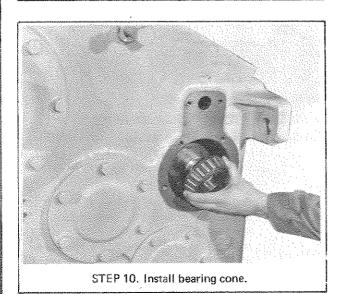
Reassembly and Installation of Bevel Gear Shaft Assembly (Sheet 1 of 4) -
